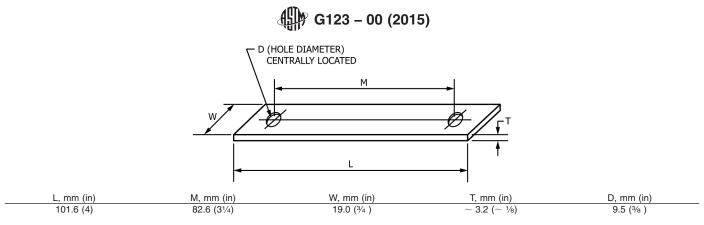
Suggested U-Bend Specimen Dimensions
